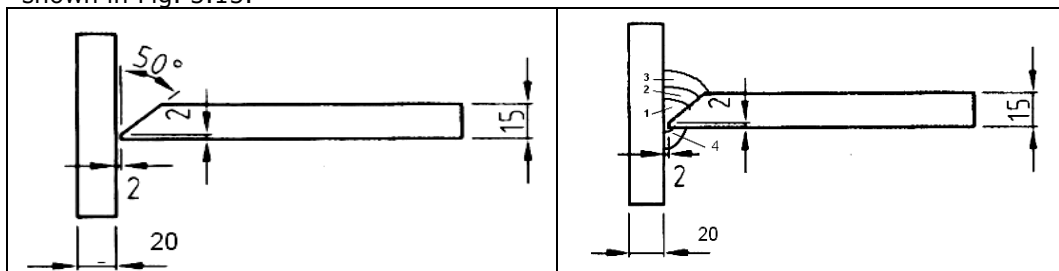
Welding technology for  $\frac{1}{2} V$  bevel weld
